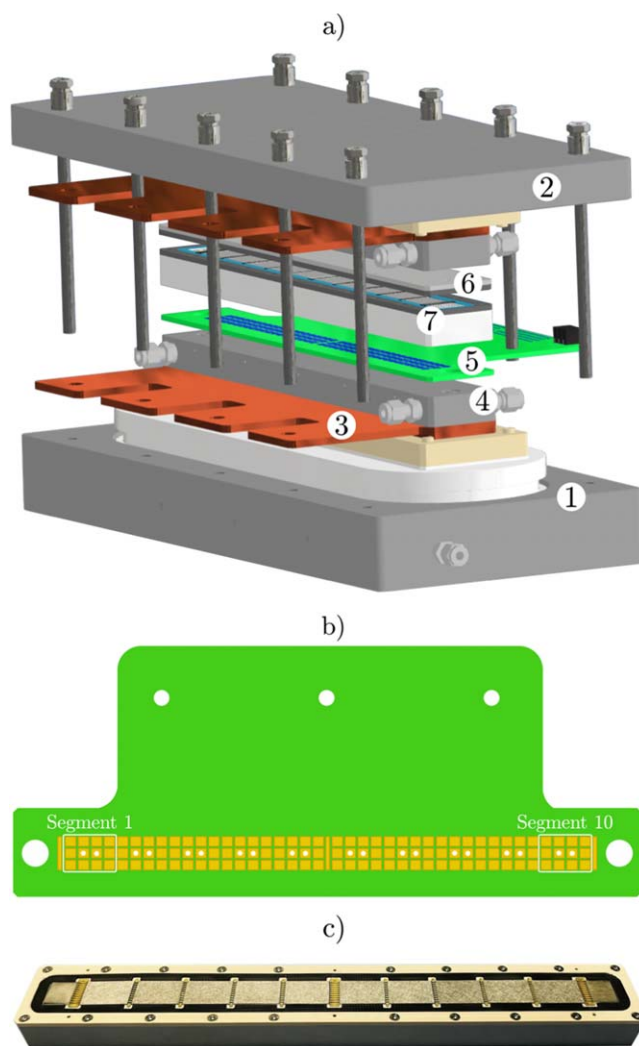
(a) Exploded-view drawing of the AtC cell (for numbering see description in the section cell setup) with default setup (anode segmented, cathode unsegmented), (b) top view on the printed-circuit board and (c) segmented flow field plate with inserted PTLs.
